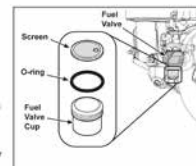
Fuel Valve Cup, O-ring, and Screen.
